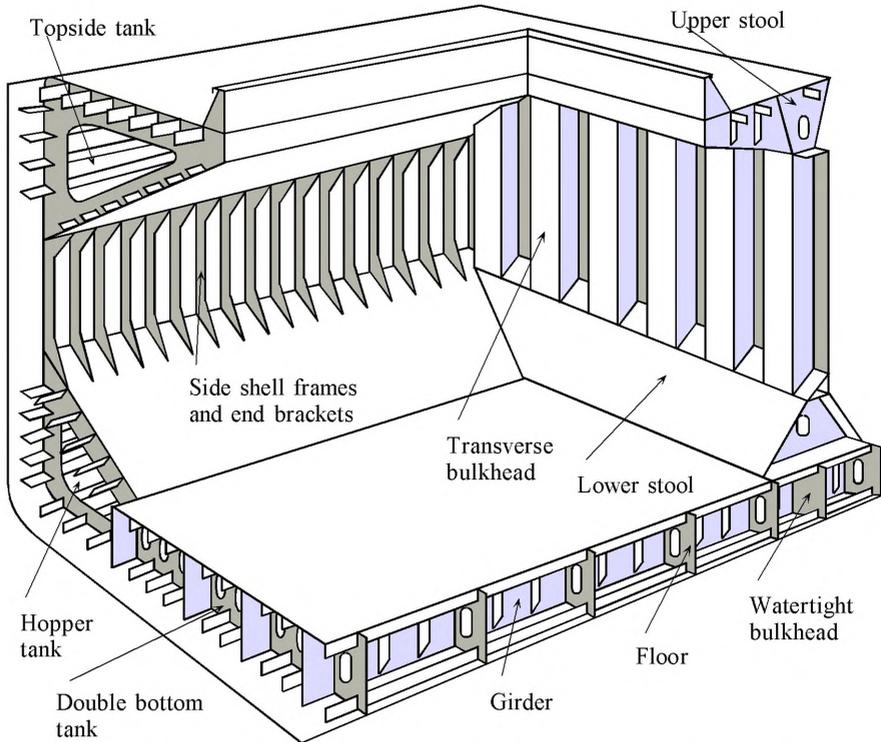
Typical cargo hold configuration for a single skin bulk carrier
